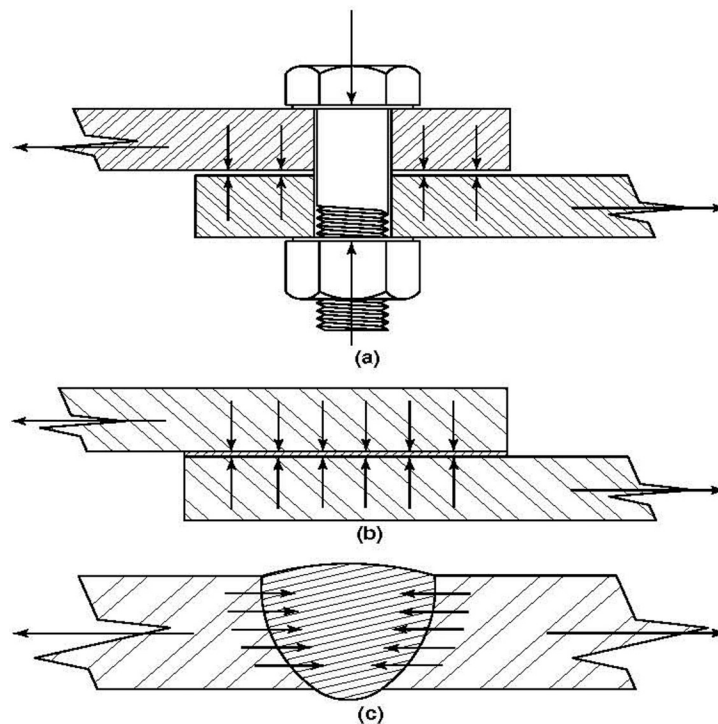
Different types of joining and type of forces used: (a) mechanical joining, (b) adhesive bonding, and (c) welding (Messler Jr., 2004).
